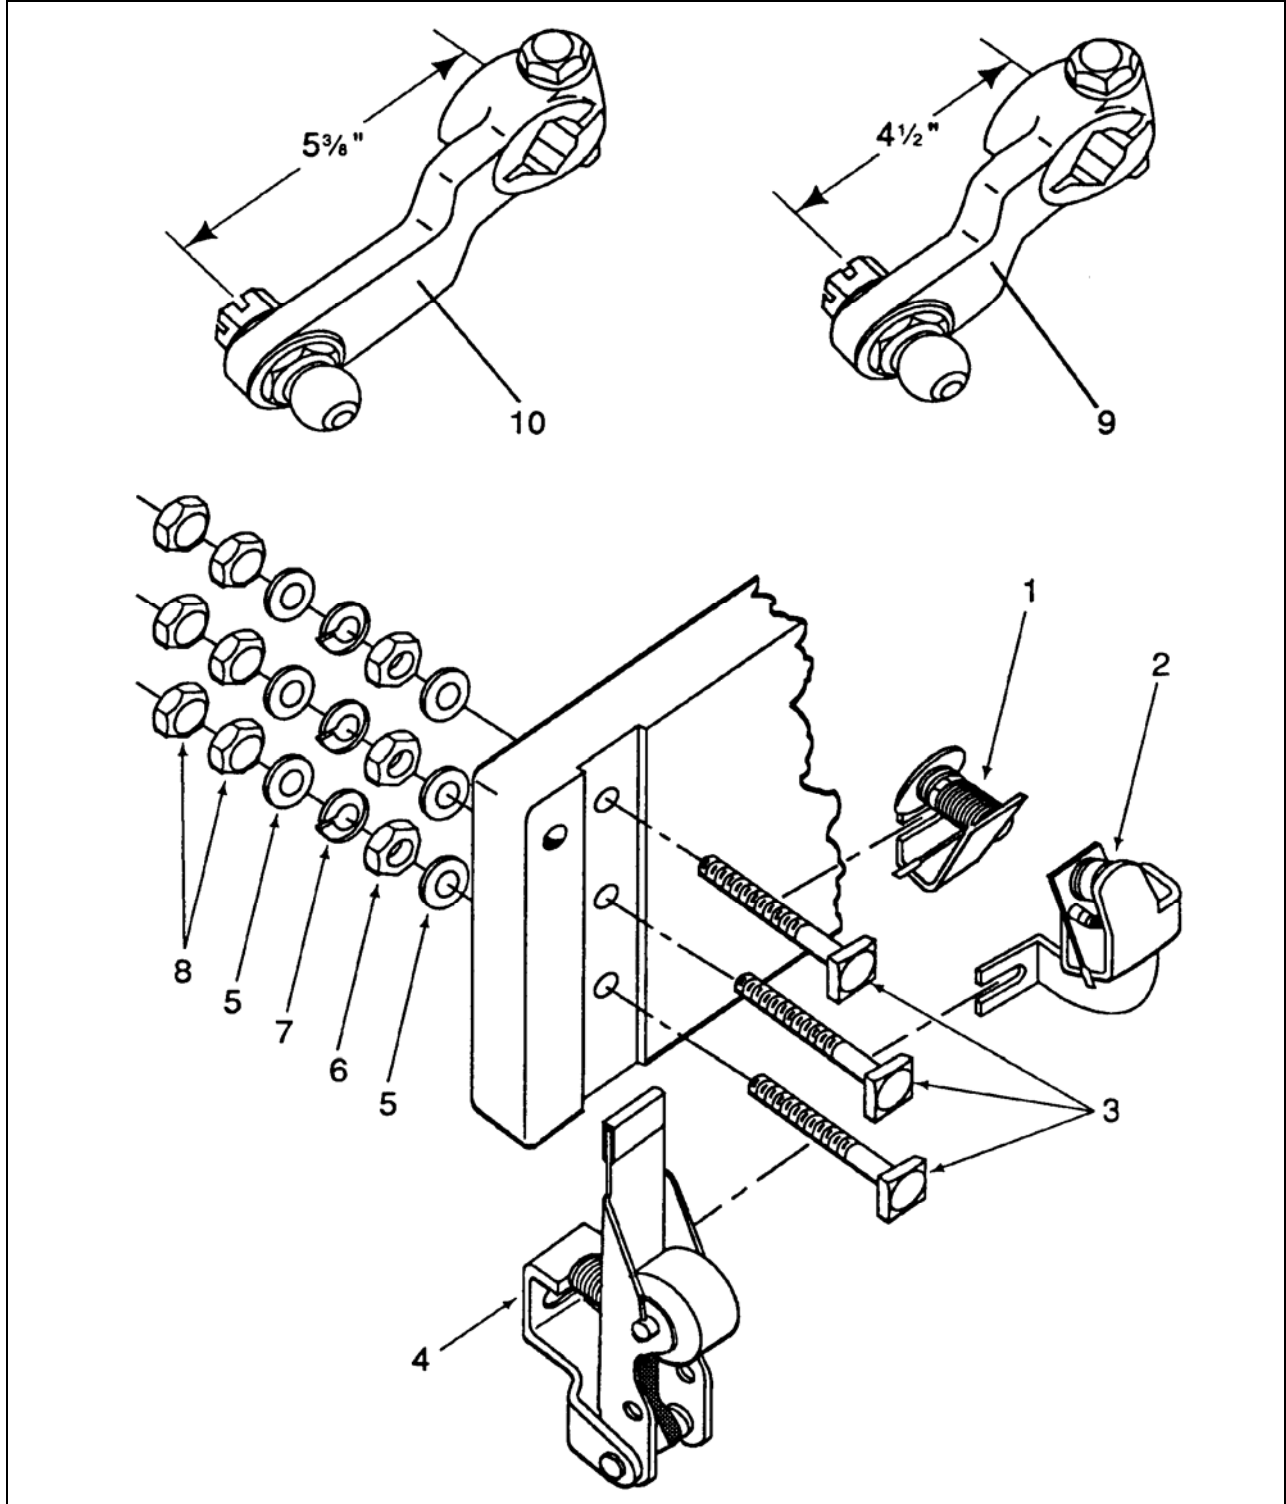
Model 7J Controller Contact Assembly and Crank Arms
